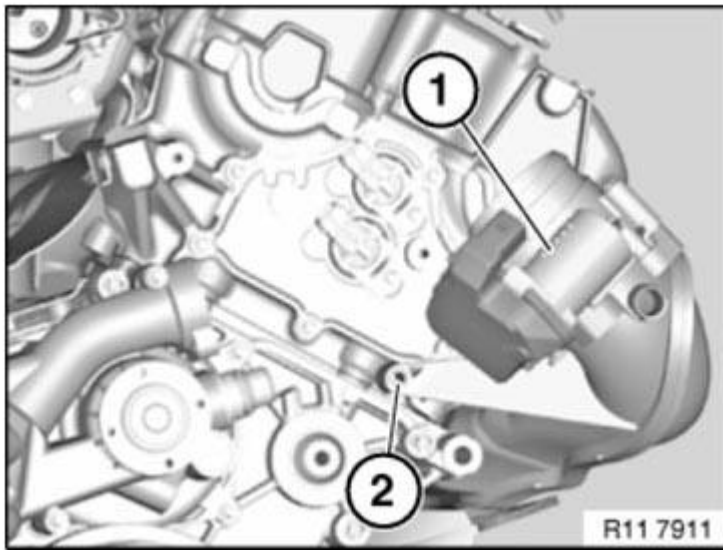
Identifying Throttle Valve Assembly (N63) And Holder Screw On Intake Plenum
